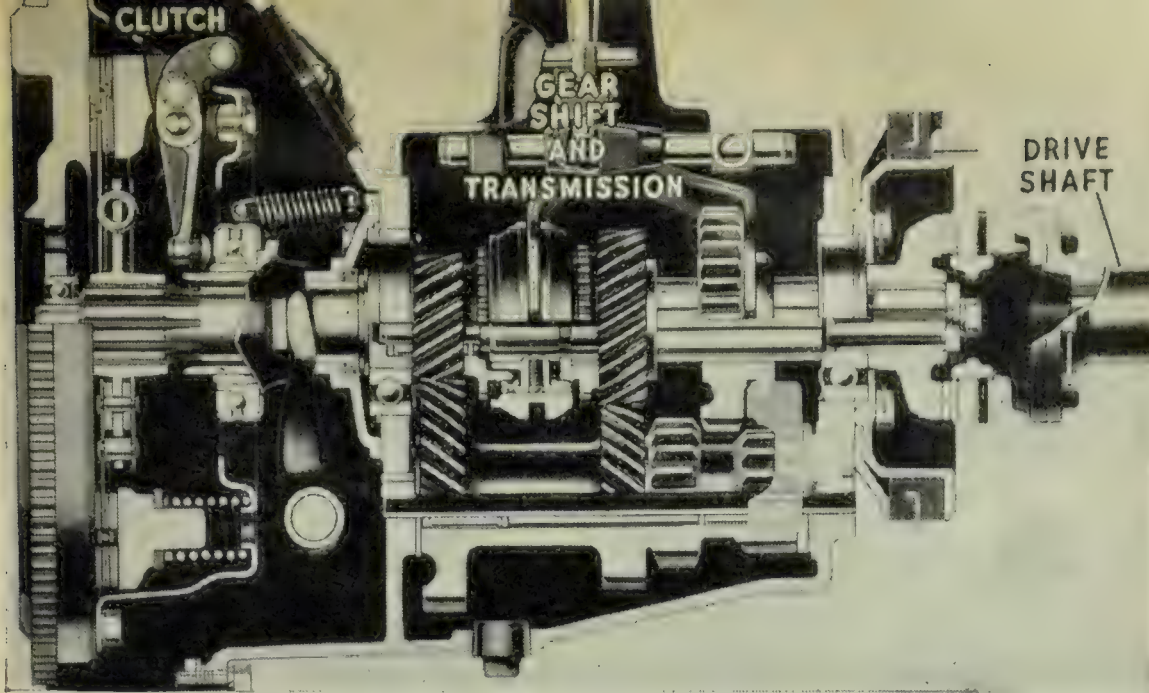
A cutaway view of the clutch and the transmission gears of an automobile. The big gear at the extreme left is on the rim of the flywheel. It enmeshes with a smaller gear on the starting motor when you use the "starter." (Ford Motor Co. photo)
